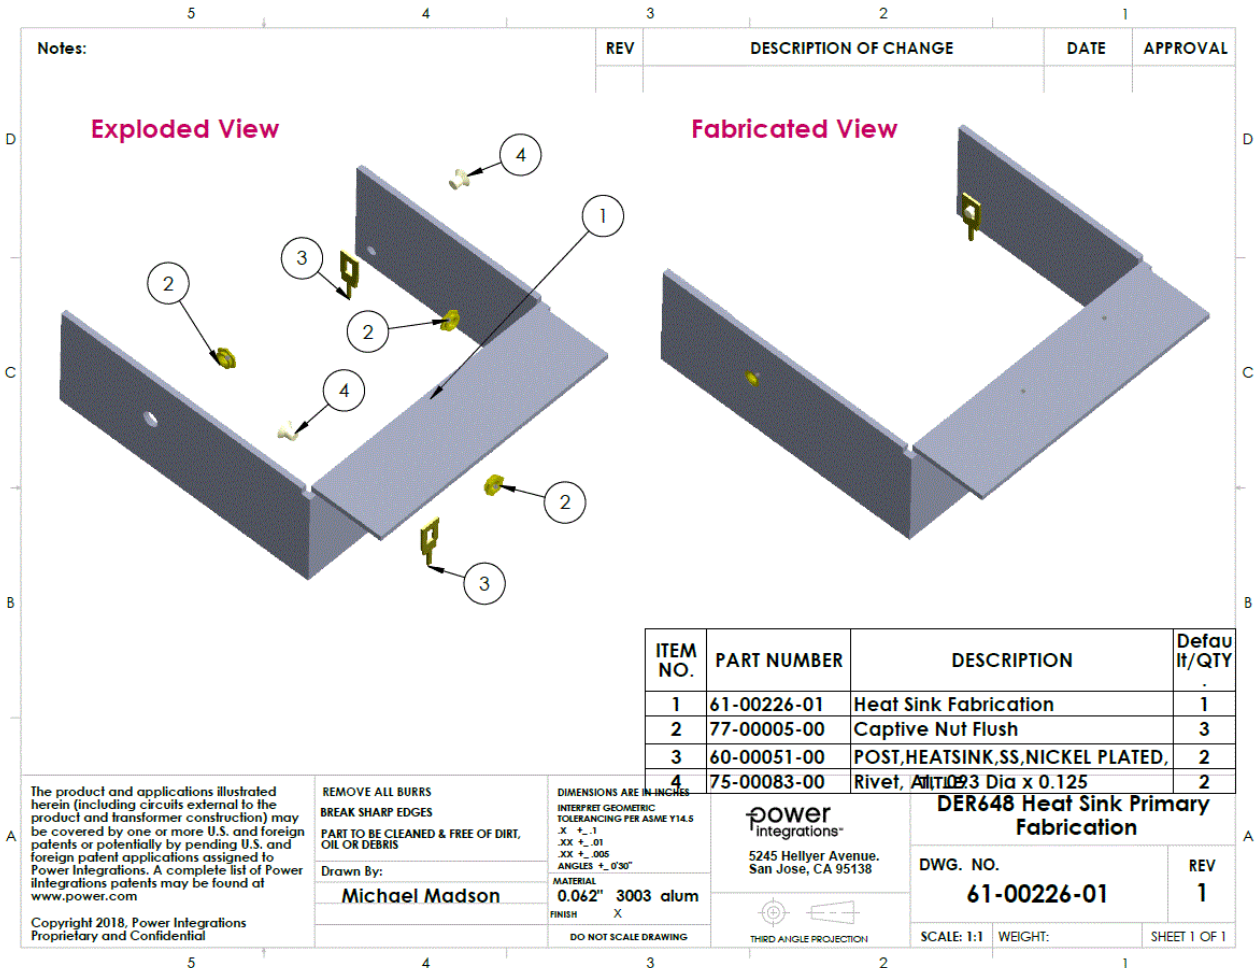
Finished Primary Heat Sink Drawing with Installed Fasteners.
